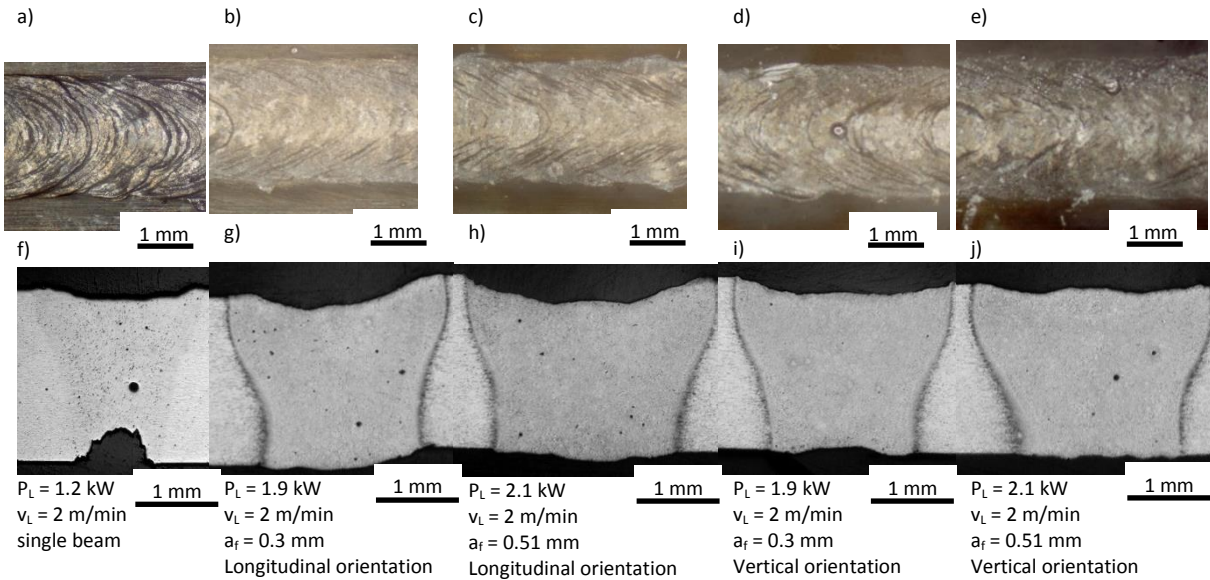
Weld seams welded with 200 μm diameter dual beam at 2 mm sheets of AA 7075; a) reference with single beam; b) to d): top view of weld seams with welding velocity of 2 m/min and with different distances of foci of 0.3 mm and 0.51 mm (a_f) and orientations; f) to j) cross sections according to top views
